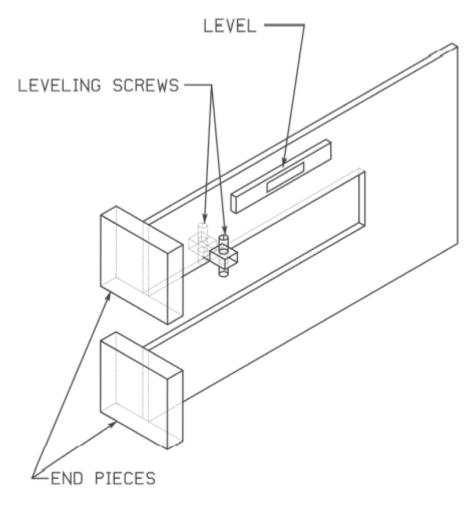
Sketch of the fixture for lateral alignment of upper and lower uranium metal cylinders.
